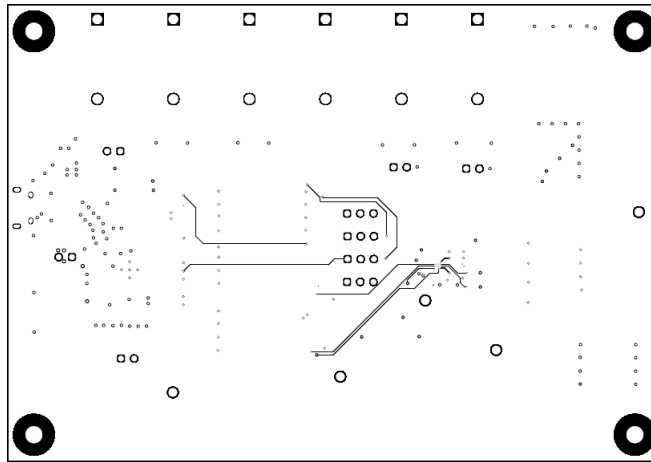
AMC6V704EVM PCB Mid Layer 3 Layout (Signal Layer)
